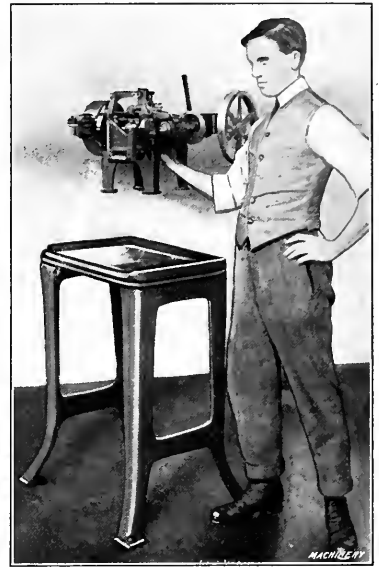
Paper Clip Machine which turns out Finished Clips at the Rate of 450 per Minute
